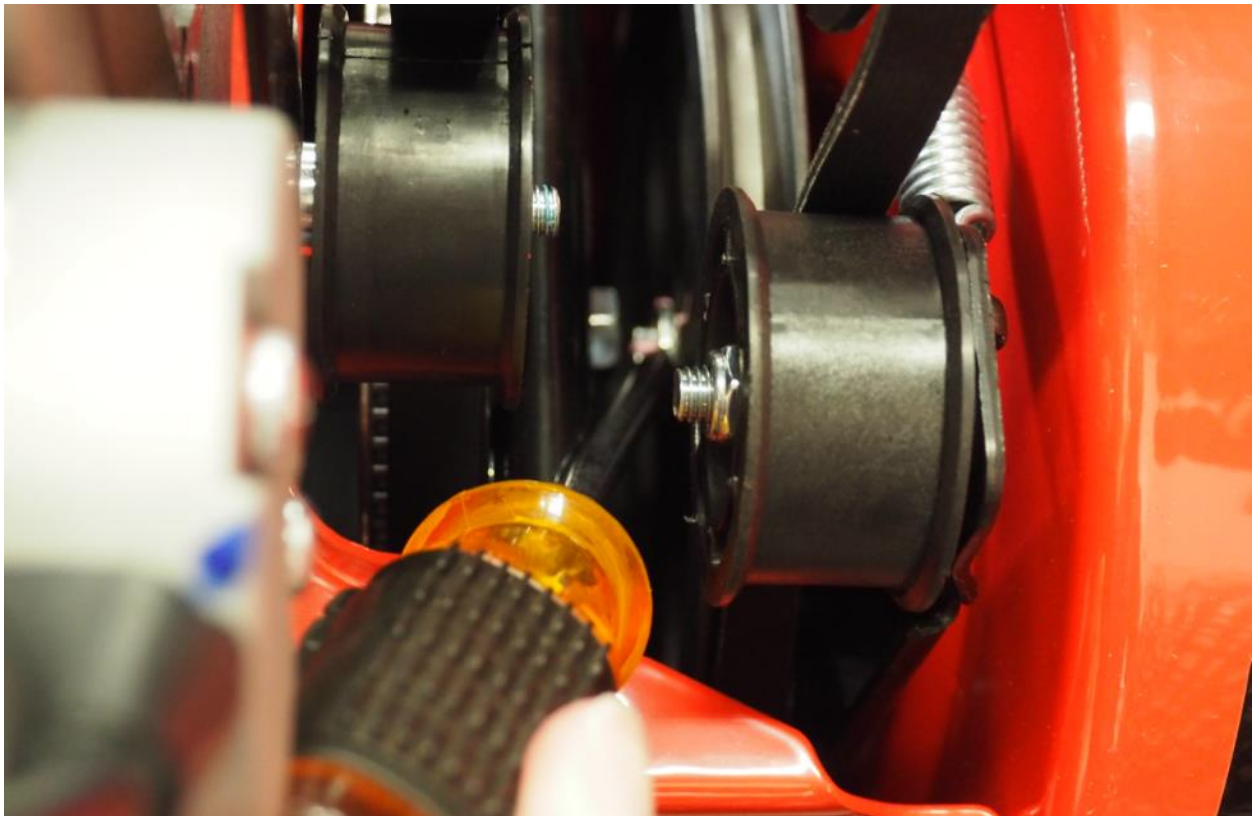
Use a tool with a long narrow end to check whether the washer can be moved.
